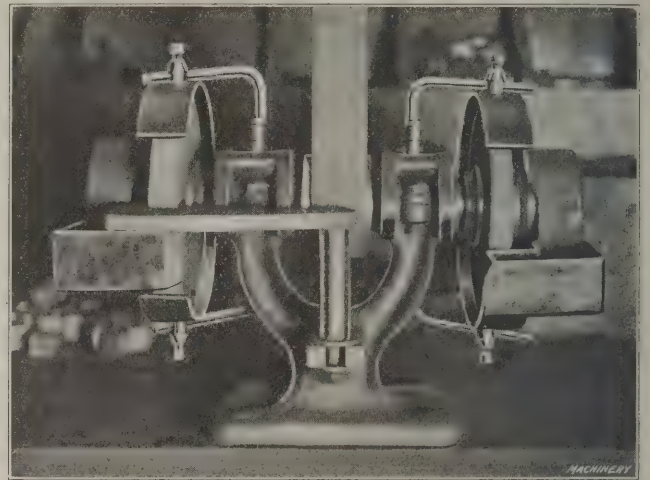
Tool-grinder equipped with Universal Wheel Guards
